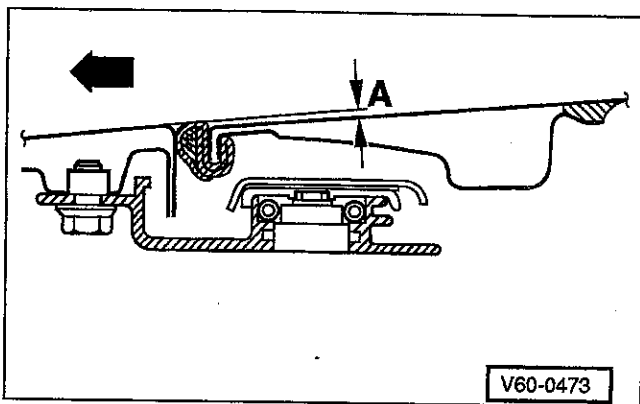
Front of sunroof panel should be 1mm (dimension A) lower than body (roof). Arrow indicates direction of travel.
